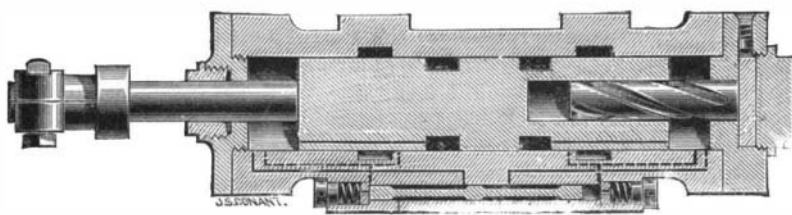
LONGITUDINAL SECTION OF ROCK DRILL.
